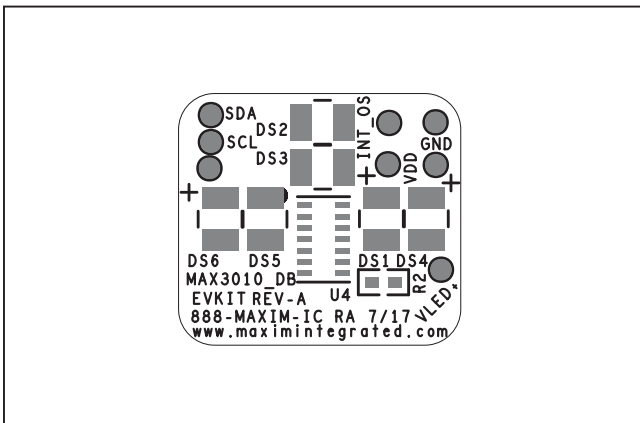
MAX30102 Daughter Board PCB Layout—Solder Side
